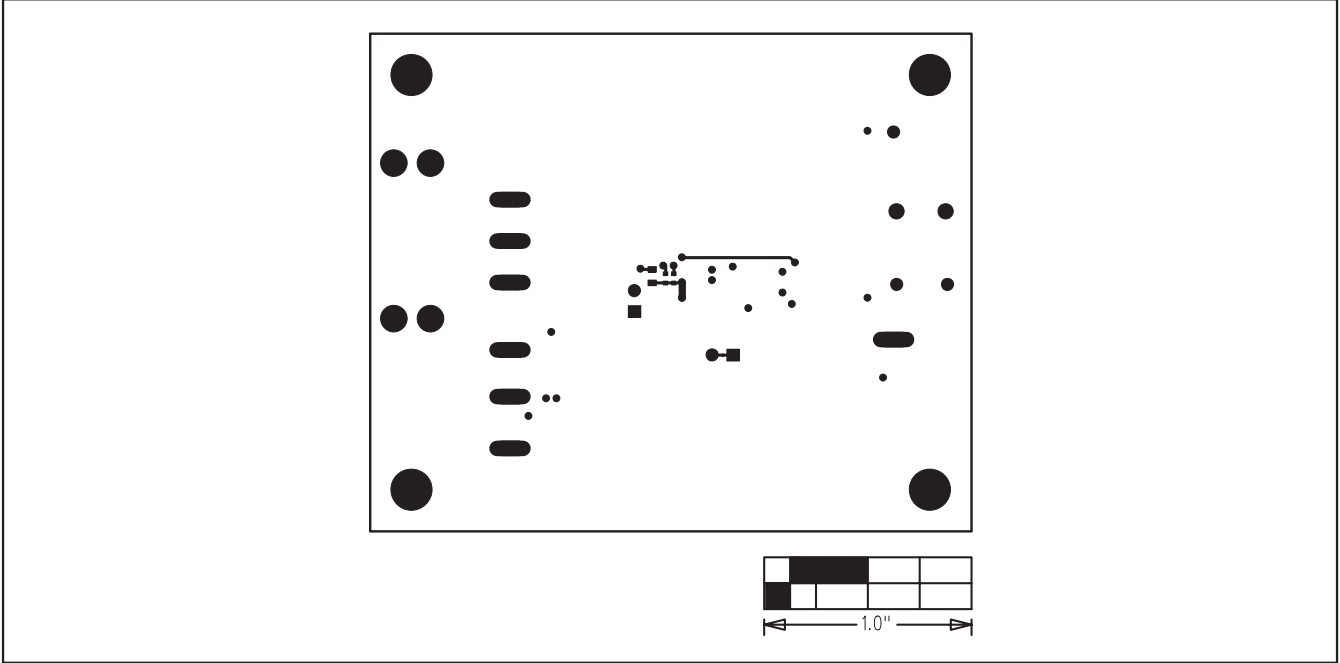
MAX13331 EV Kit PCB Layout—Solder Side
